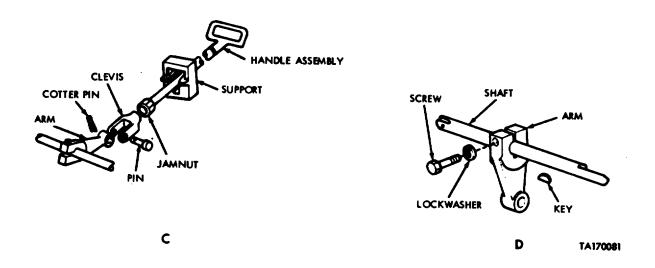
Removal or installation of carrying hooks and shafts (sheet 2 of 2).
